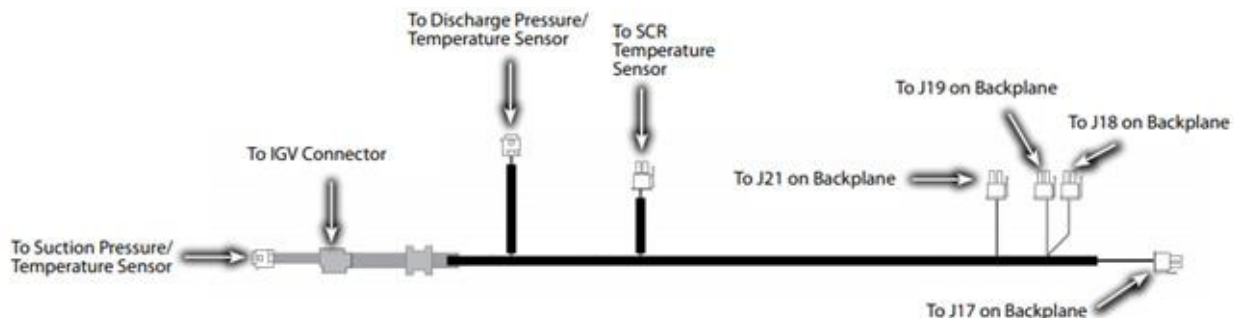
Major Rev G and Earlier Compressor Controller Cable Harness (Kit# 100322)
